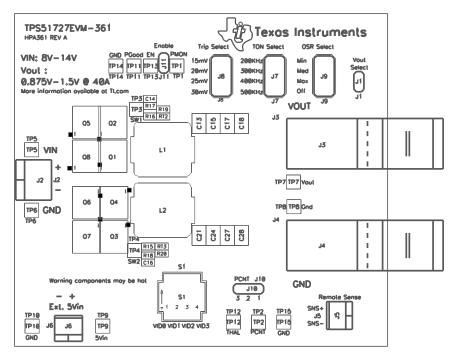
TPS51727EVM Top Layer Assembly Drawing, Top View
